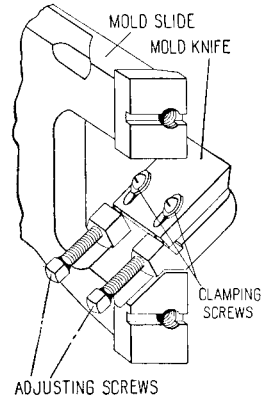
View of the back knife and the adjusting and clamping screw for bringing the edge of the knife in exact position against the mold disk, so that it will shave the back or bottom of the slug and at the same time will not cut the mold disk.
